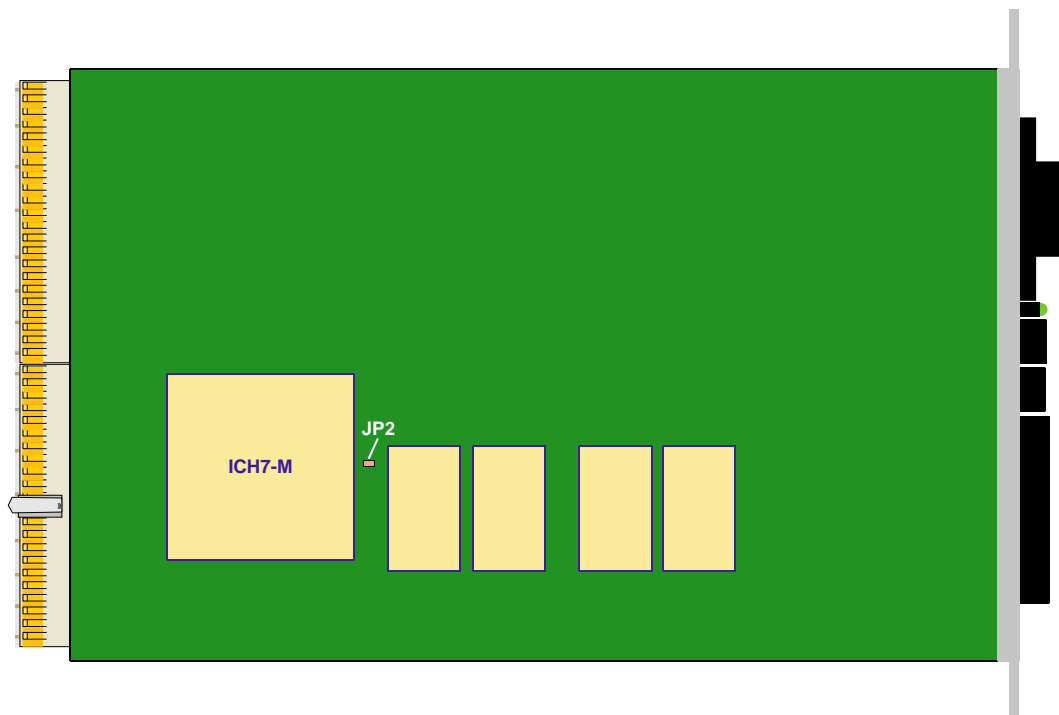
4 HP CP305 Board Layout (Bottom View)
